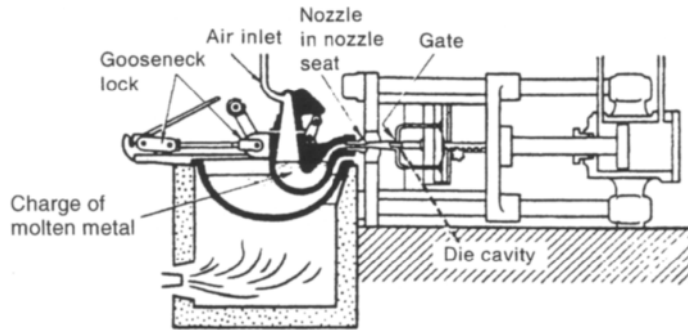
Schematic of a low pressure or gooseneck die casting machine. (Reproduced from *Casting Aluminum*, with permission of Alcan Aluminium Limited.)
